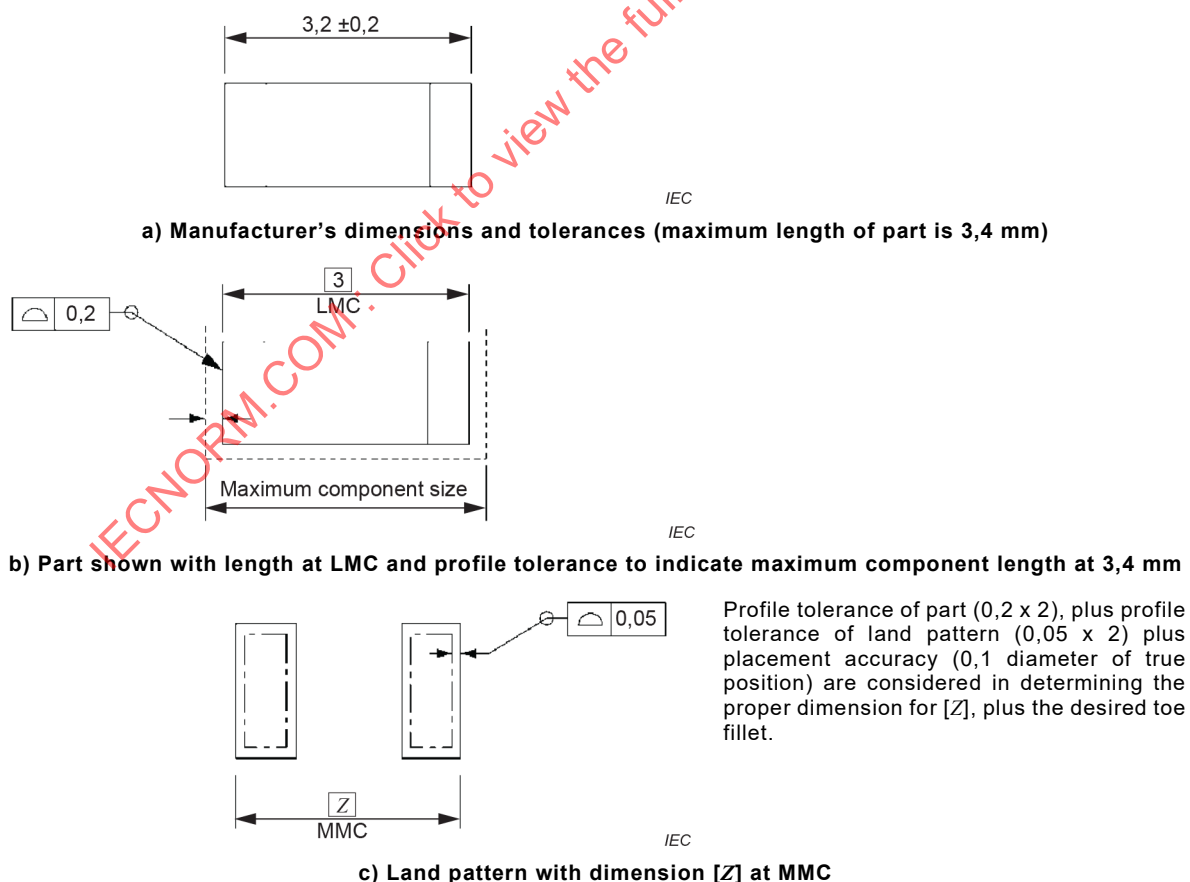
Example of 3216M capacitor dimensioning for optimum solder fillet condition
